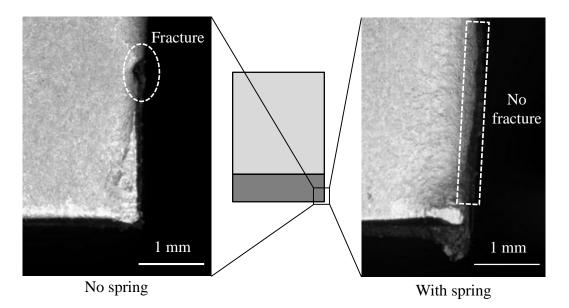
Lower part of the inclined zone of JSC1180YN steel sheet after trimming with and without coil spring.
